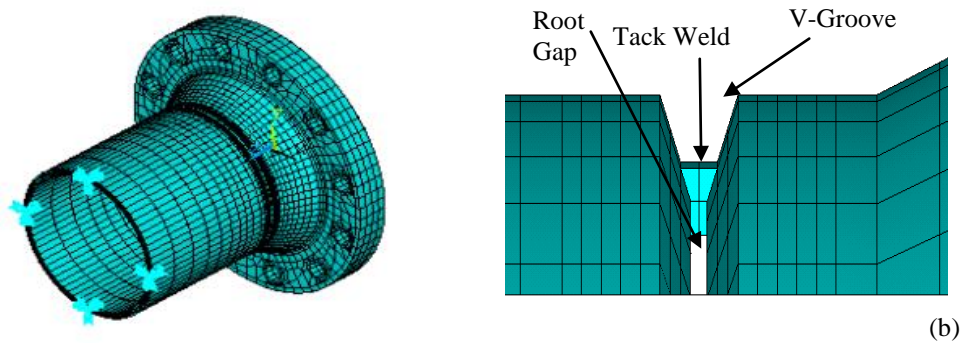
(a) 3D FE model of pipe-flange joint, (b) Tack weld position
